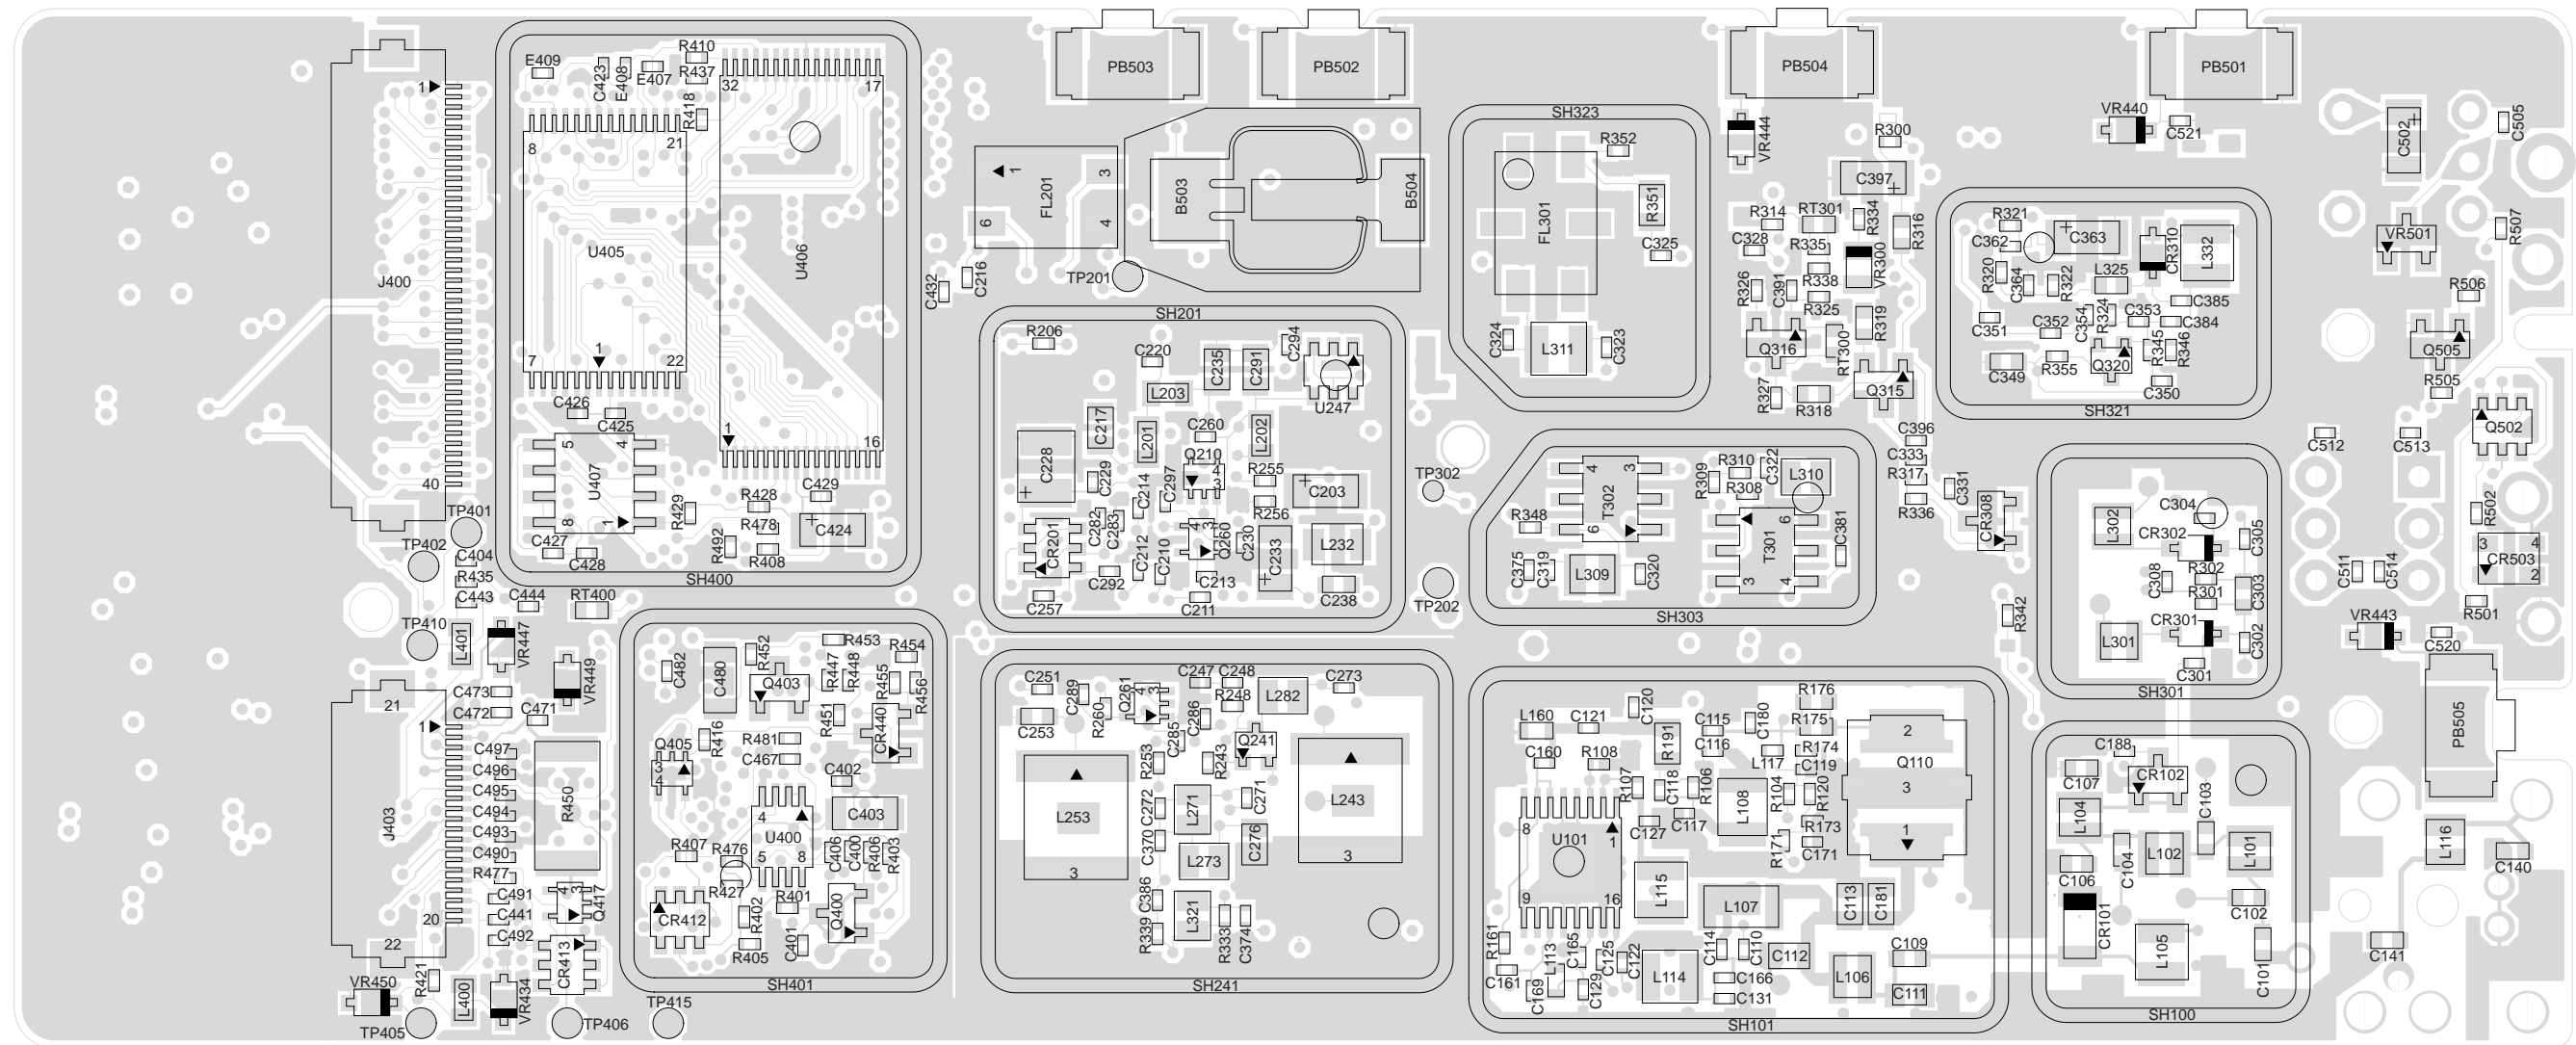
UHF (450-527 MHz) 5000/7000 Series Main Board Top Side PCB 8485677Z03
